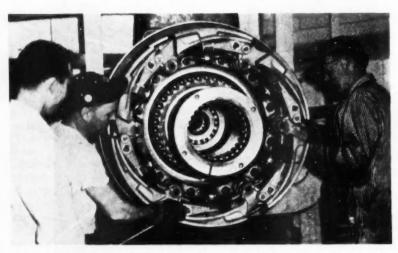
For the Army Barc, Fawick developed an experimental brake system composed of a six-shoe assembly for each wheel, designed to operate in a 35-in. diameter brake drum.
